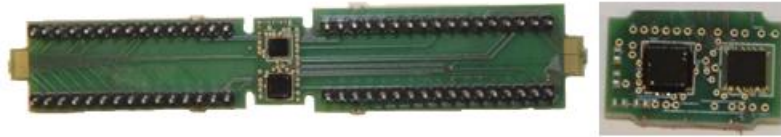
Photograph of the Remi firing board. Left side shows the board with mounted components and test pins. Left side shows the part of the board suited for mounting inside a 30 mm projectile.
